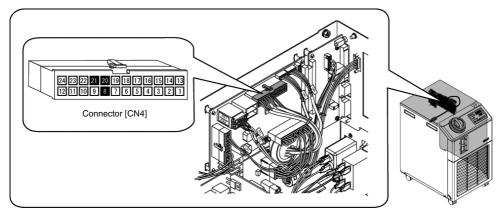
Check the connection of the circulating fluid pressure sensor
